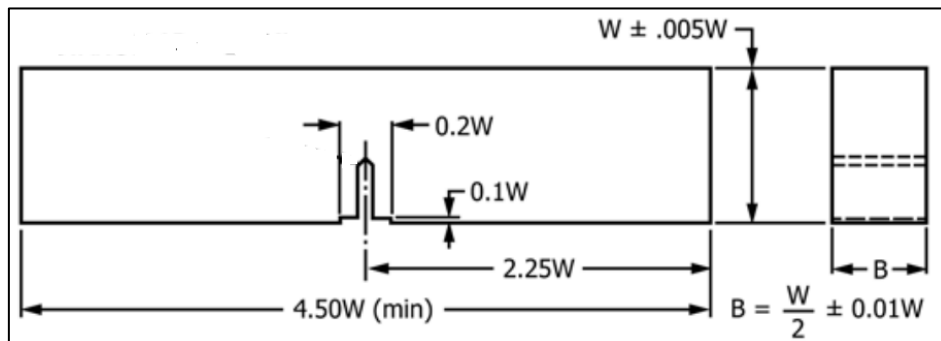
Drawing of the TPB specimen (*ASTM E1921*)
